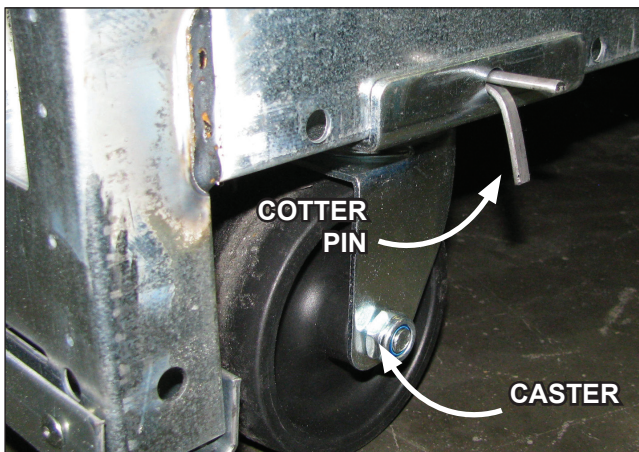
Removing the casters is an easy process. Simply flatten and remove the cotter pins that are holding the casters in place. Then lift the case with a "J" bar and slide the caster assemblies out. The dismantled casters can now be discarded.
